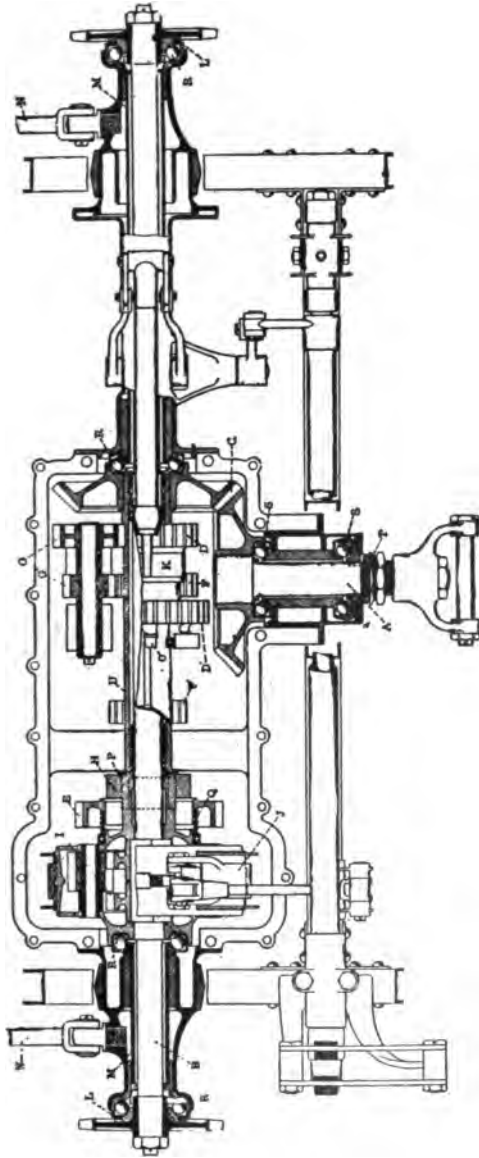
Diagram of the Transmission of the Pope-Toledo Car. The parts are: A, drive shaft; B, jack shaft; C, mitre gears; D, sliding gears; E, differential clutch gear; F, countershaft gears; G, reverse gear; H, differential clutch; I, differential gears; J, differential brake; K, sliding gear fork; L, adjusting cup; M, adjusting sleeves; N, radius rod; O, sliding clutch; P, countershaft pinion; Q, differential clutch spring; R, S, ball races; T, adjustable nut; U, sliding gear sleeve.
